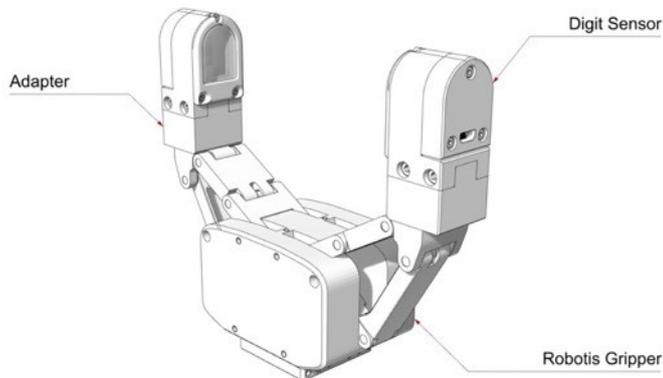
Technical drawing of the Robotis RH-P12-RN gripper with the Digit sensor at the fingertips
